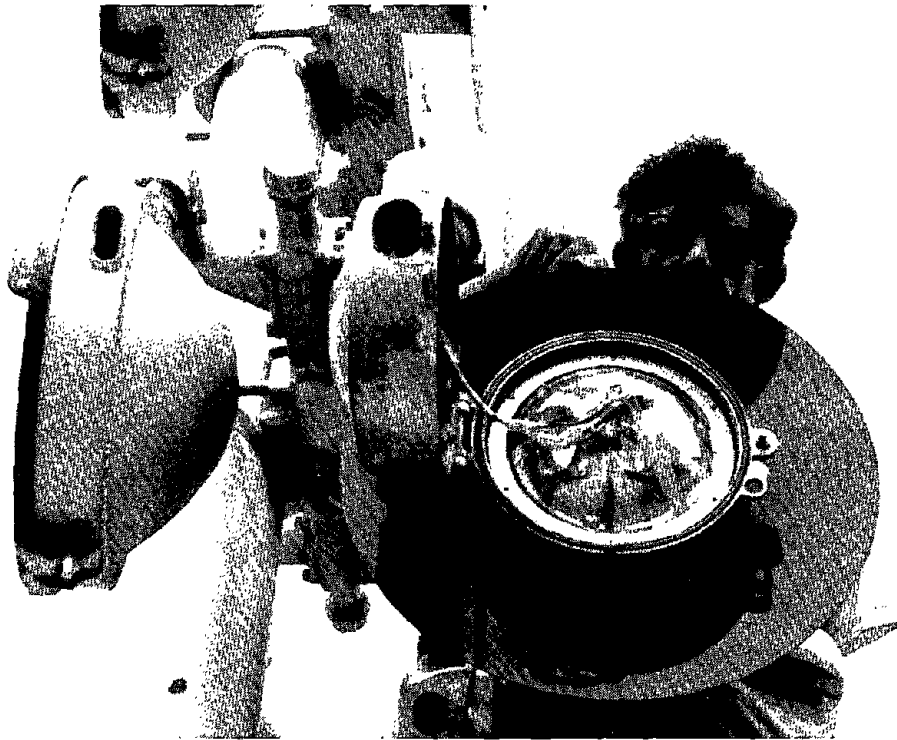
SEALED-BEAM FLASHLAMP UNIT BEING INSTALLED
